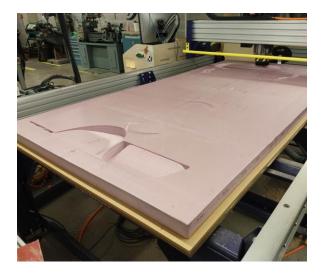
First stages of CNC machining the foam mold pieces that will be glued together
